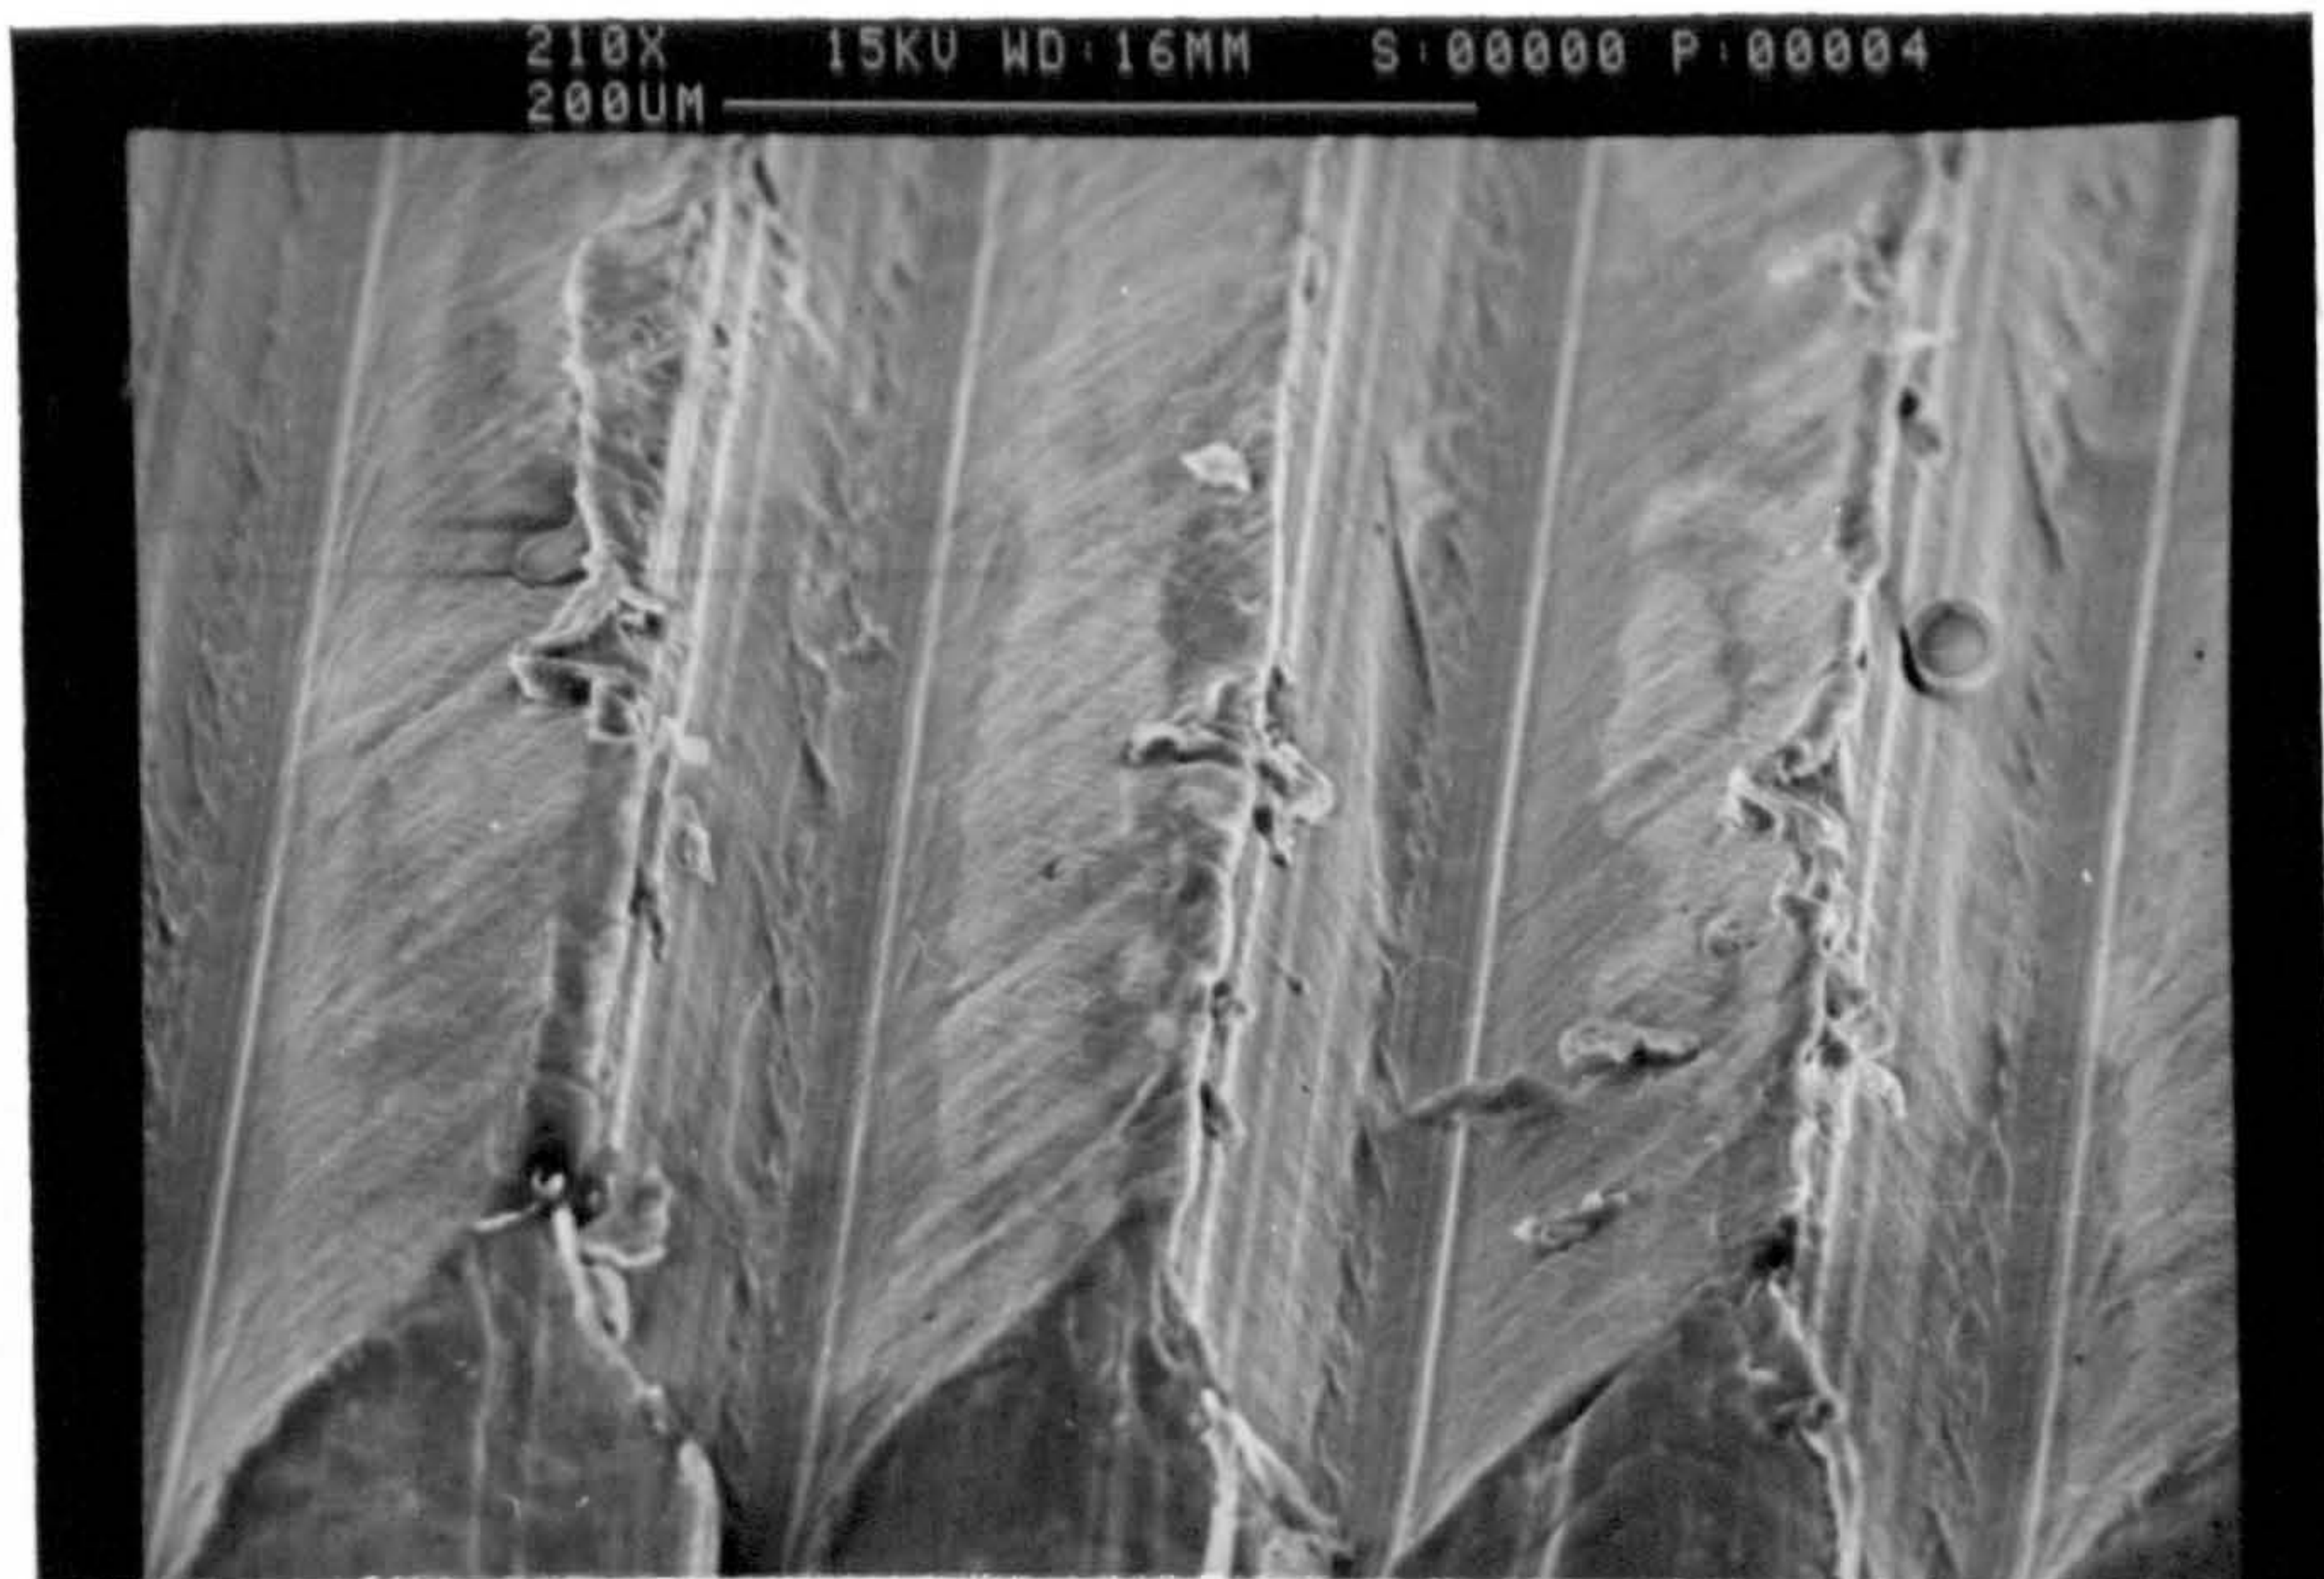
HDPE surface machined at  $30^\circ$  rake angle, showing grooves along the work movement. (Speed = 25 m/min, feed = 0.16 mm/rev)
